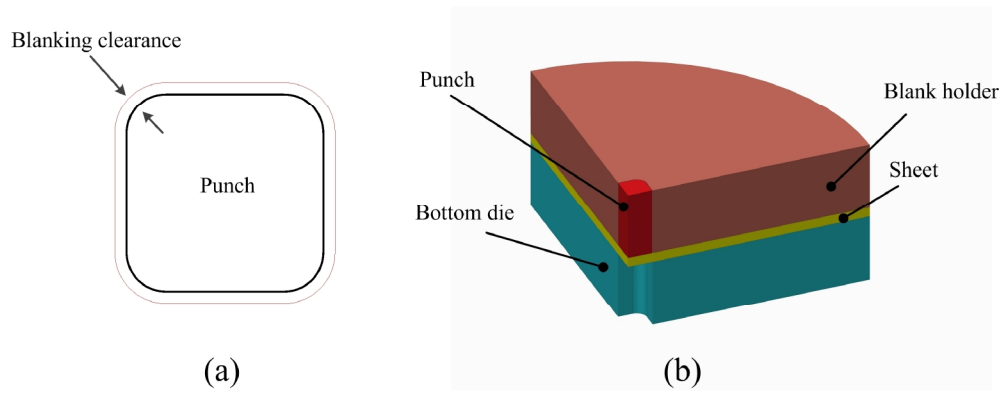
Geometric model (a) the sketch map of punch and blanking clearance (b) the assembled model
